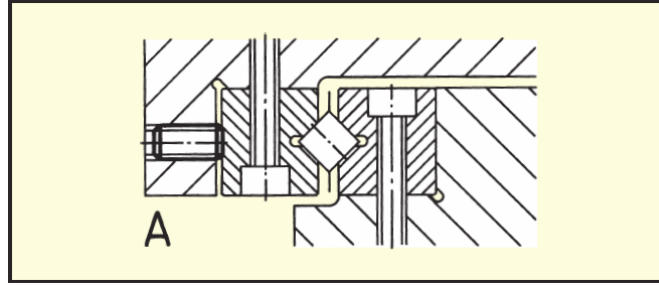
Mounting scheme of a crossed-roller cage linear bearing (source Schneberger)
